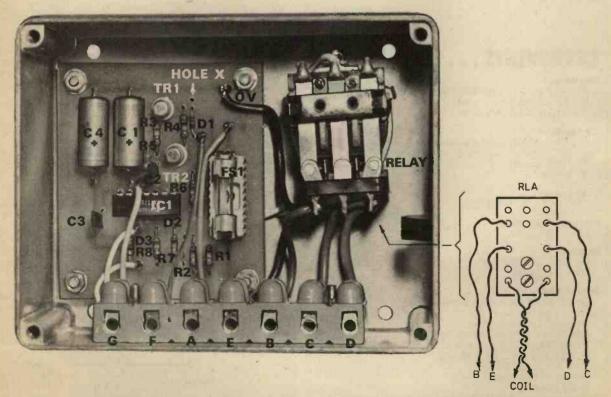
Component layout of Burglar Alarm board. The spare pad (marked X) is for the "positive earth" modification
